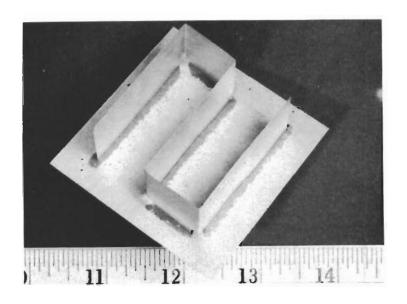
TYPICAL .002 - .013 INCH BRAZED TEE JOINT SPECIMEN
